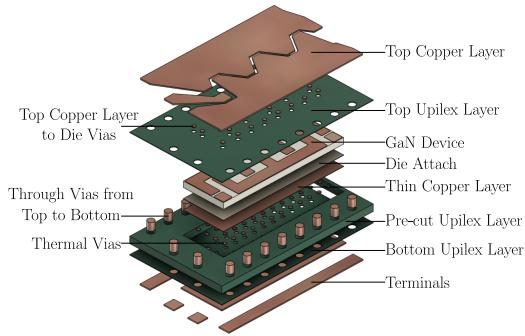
Exploded view of the 3D CAD model of the designed package.
